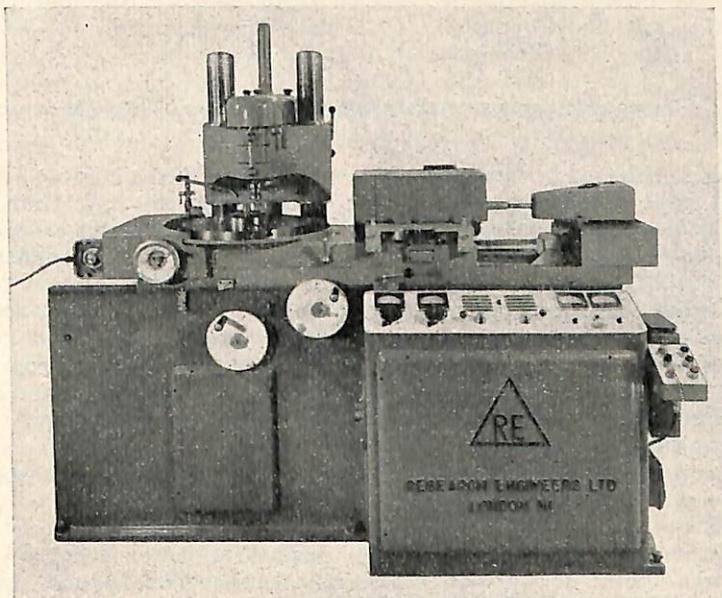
The Electronically-controlled Cam-milling Machine built by Research Engineers Ltd., and converted to Computer Control by E.M.I. Engineering Development, Ltd.
